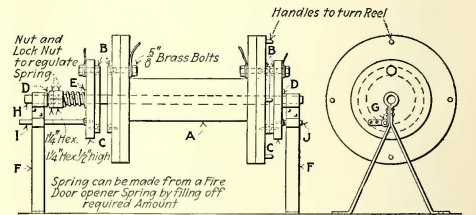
CABLE REEL FOR PORTABLE WELDING OUTFITS
